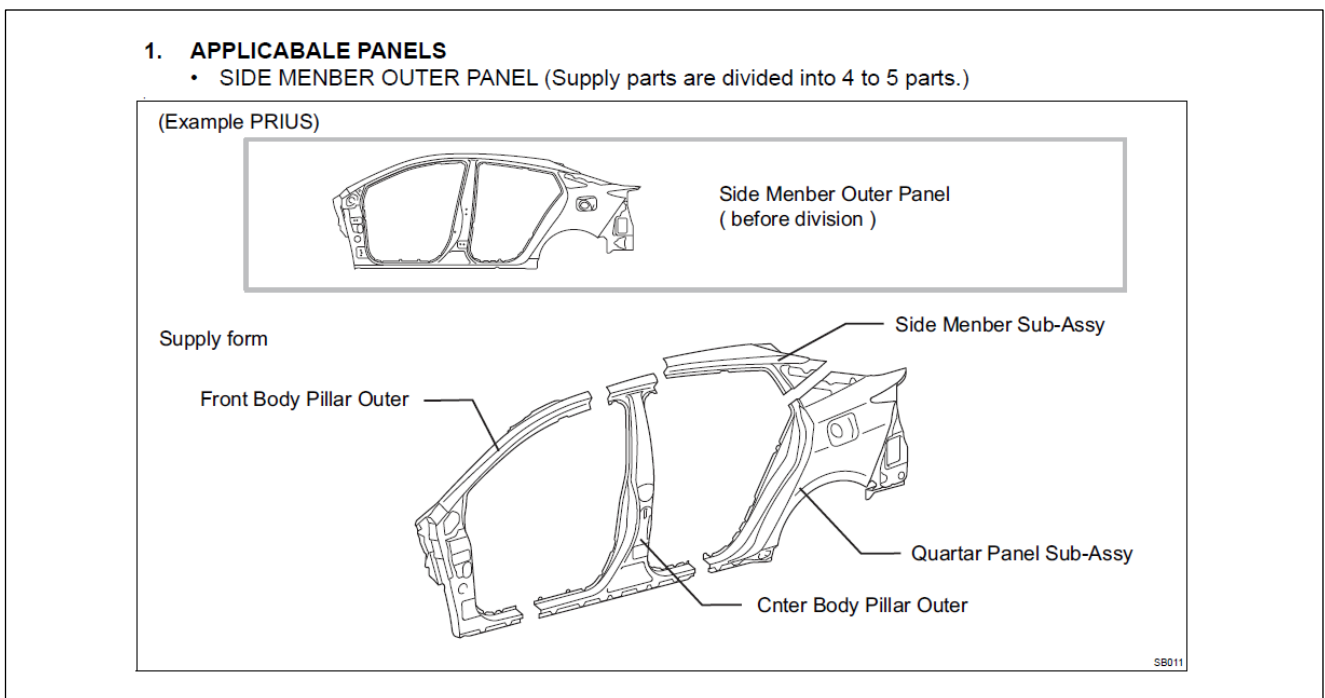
Excerpt from the Toyota's 'Partial Repair of the Outer Panels (Cut & Join Repair of Outer Panels)' Technical Bulletin.
